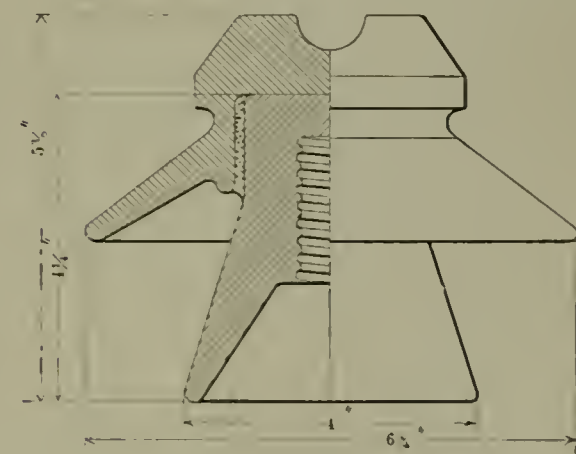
A SECTIONAL VIEW OF THE INSULATOR SHOWN ABOVE
